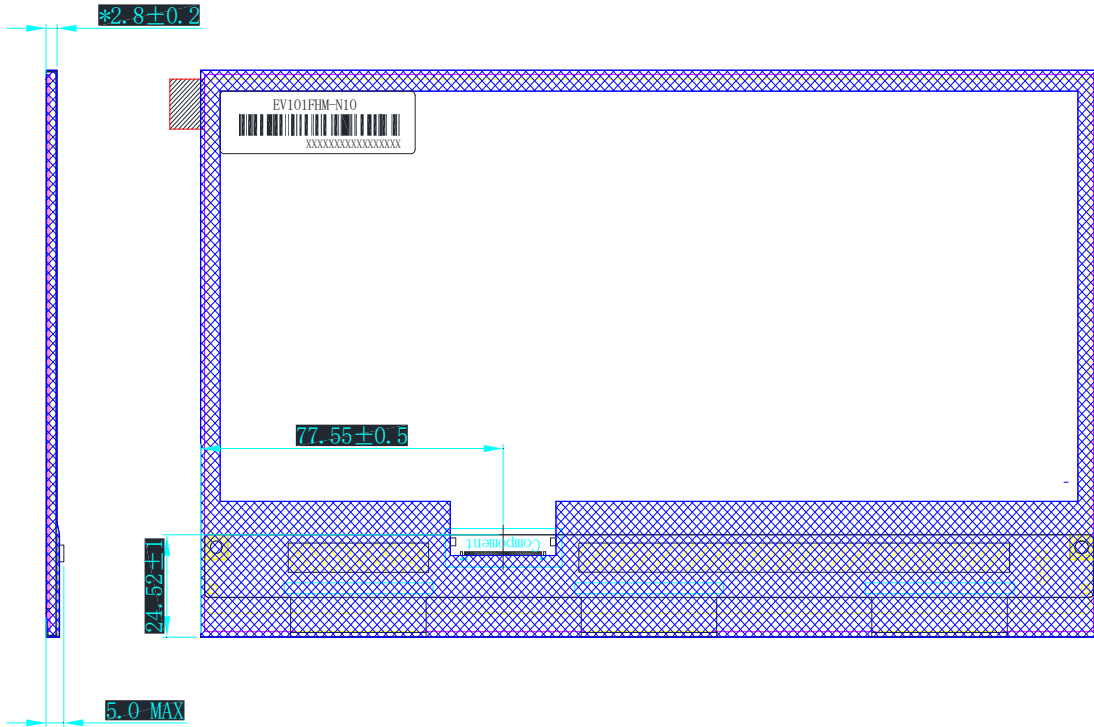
TFT-LCD Module Outline Dimensions (Rear view)
